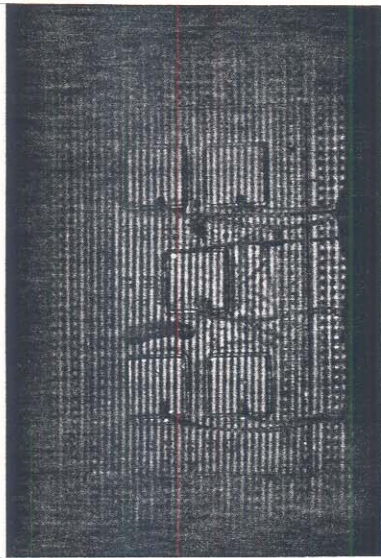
A printed wiring board with a holo-interferometric carrier fringe pattern.
